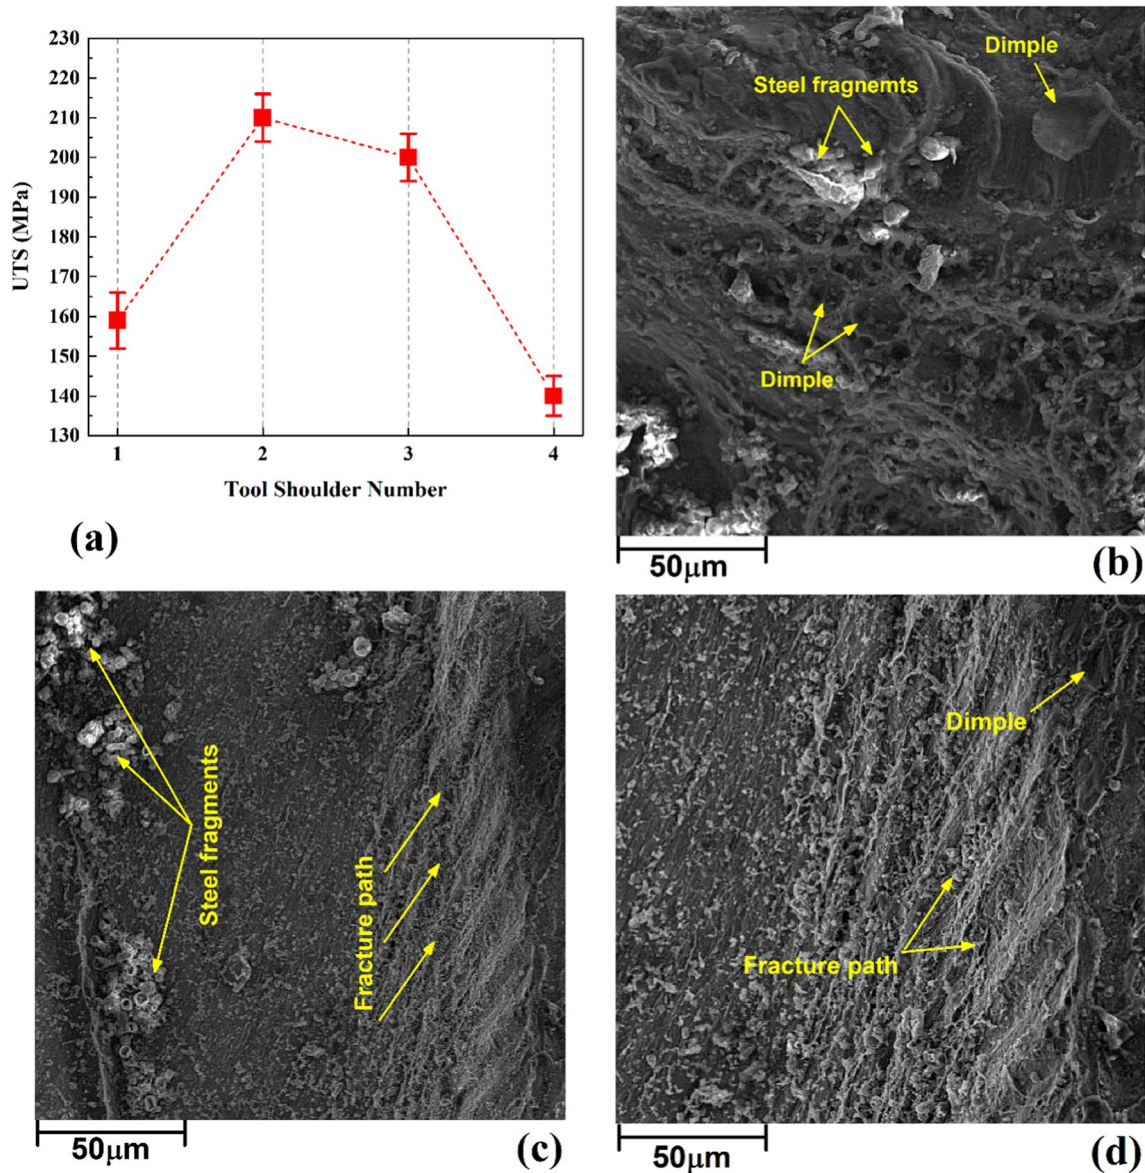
a UTS versus tool shoulder number. The fracture surface of b Tool I, c Tool II and d Tool IV joints
